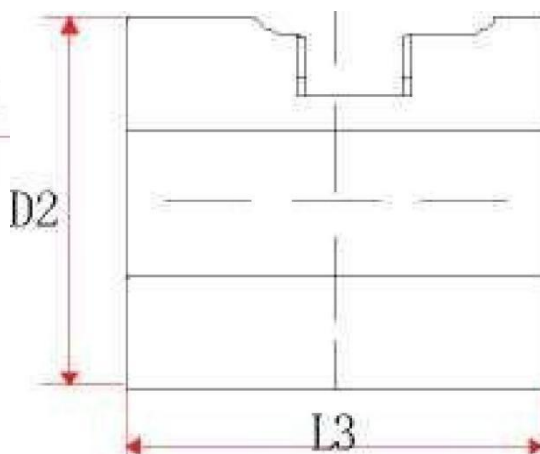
DN4~DN200 Flange-Mounted Type Turbine Flow Sensor Dimensions
